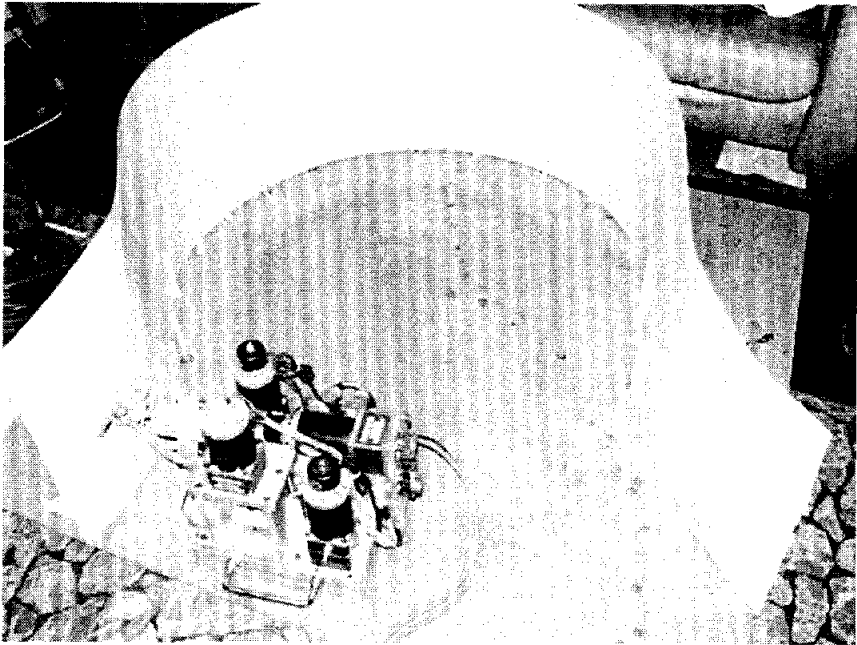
Practical welding path for seam tracking experiment
